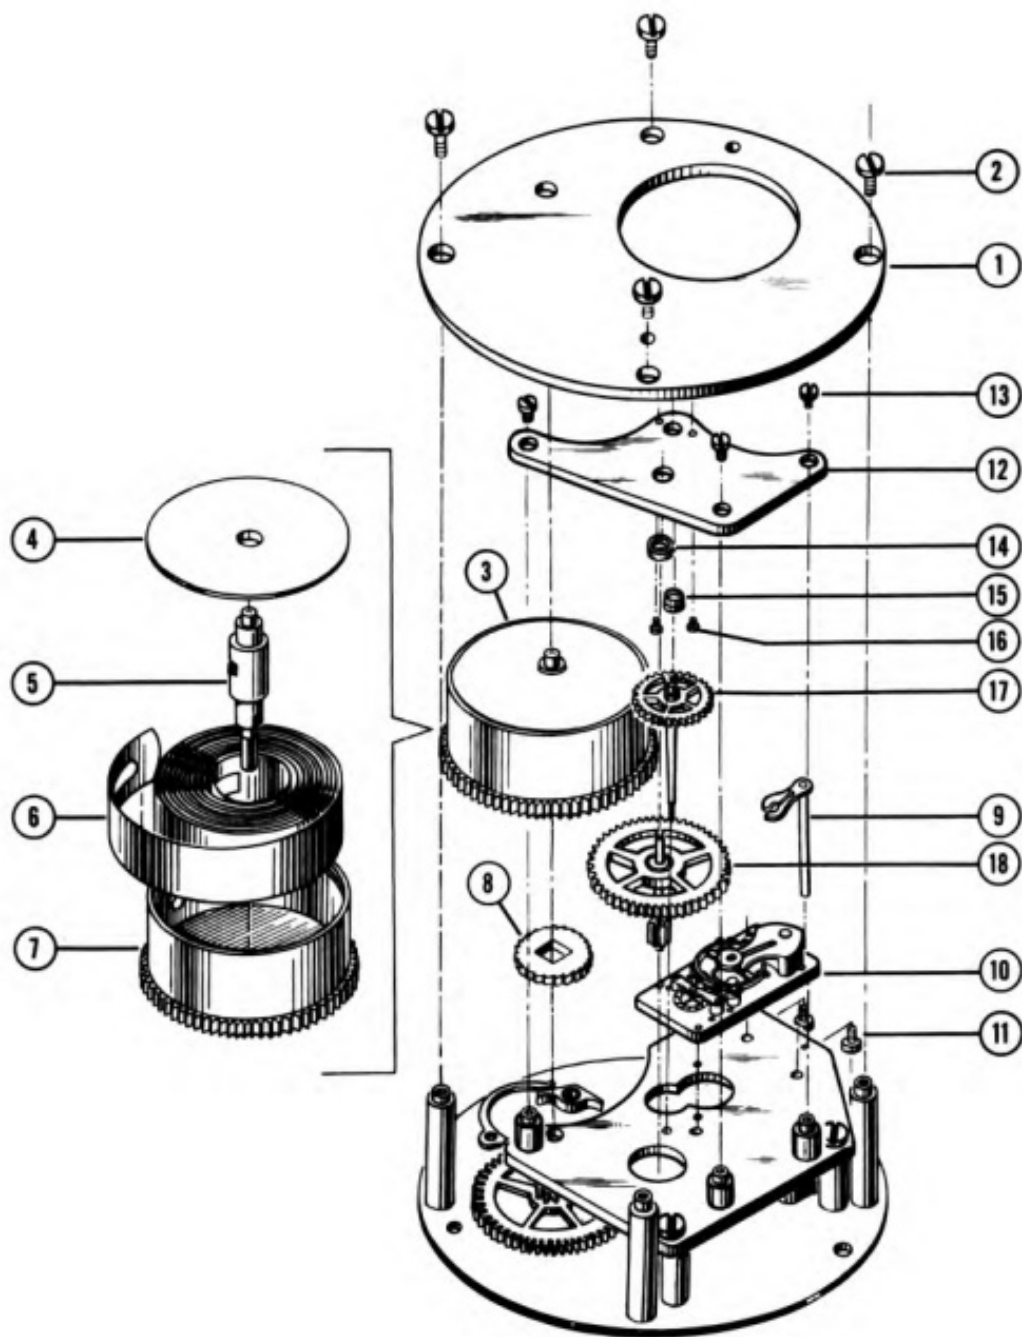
Chelsea No. 12E Mechanical Clock Components—Exploded View
